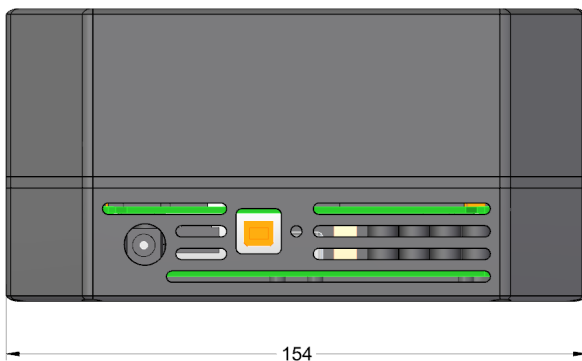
G3 camera with standard cooling and internal filter wheel bottom view
